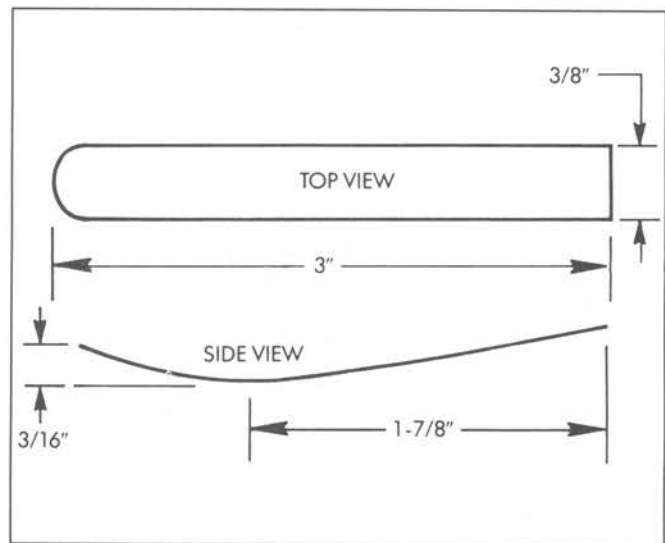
Rework of .017" and .004" Feeler Gage Stock
